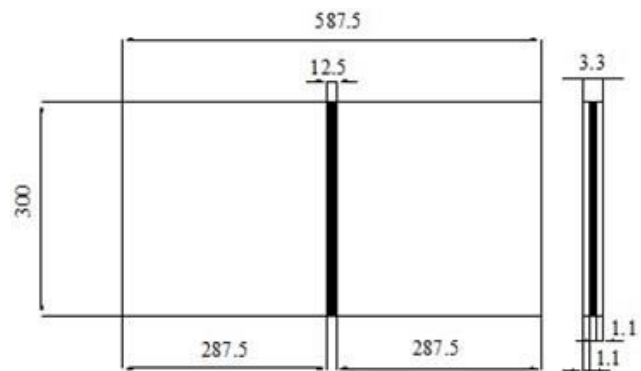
Geometric dimensions of the adhesive bonded plates (in mm).
